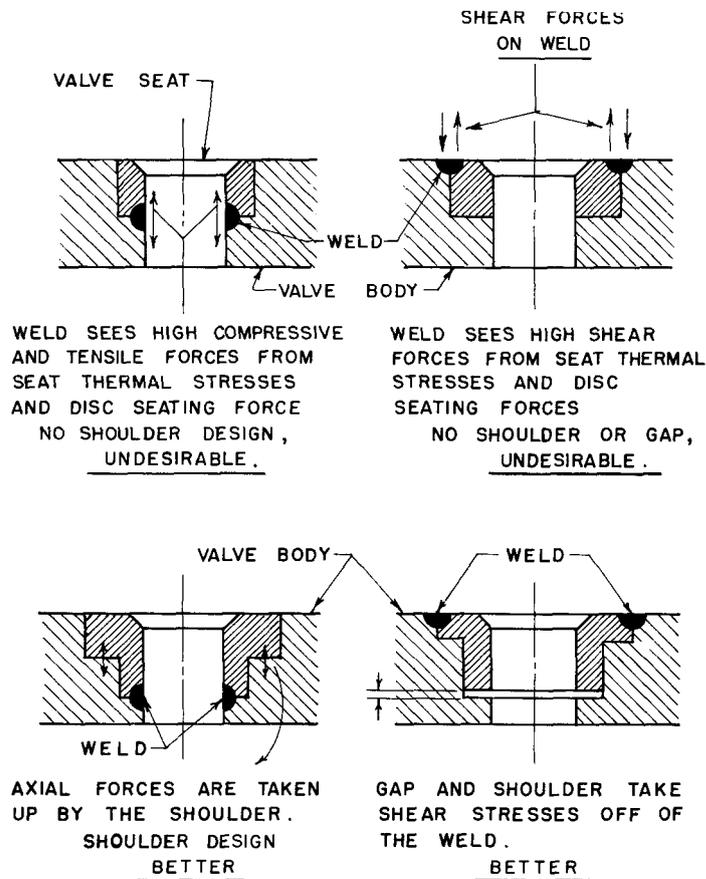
Design for Shoulder in Valves With Welded Seats.
